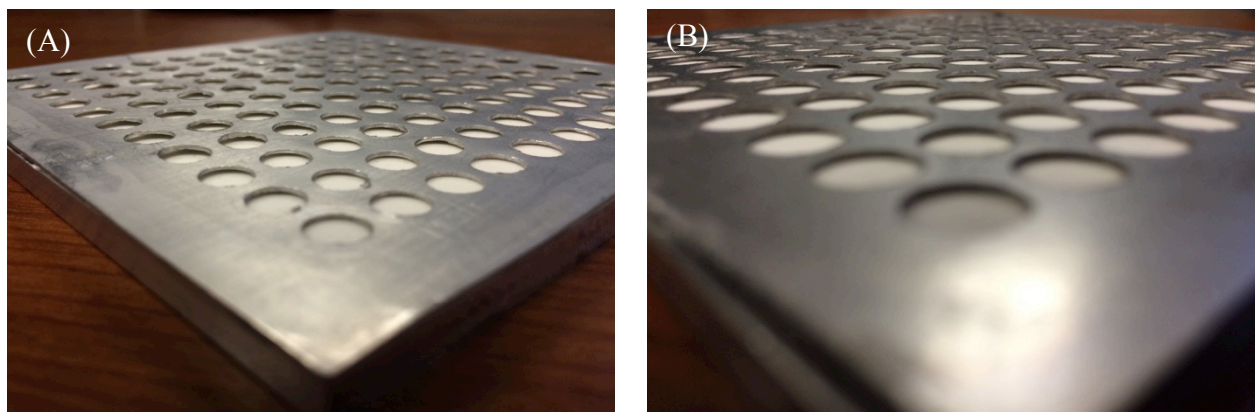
Close-up view on the top layer separation of the (A) aluminum and (B) steel samples
